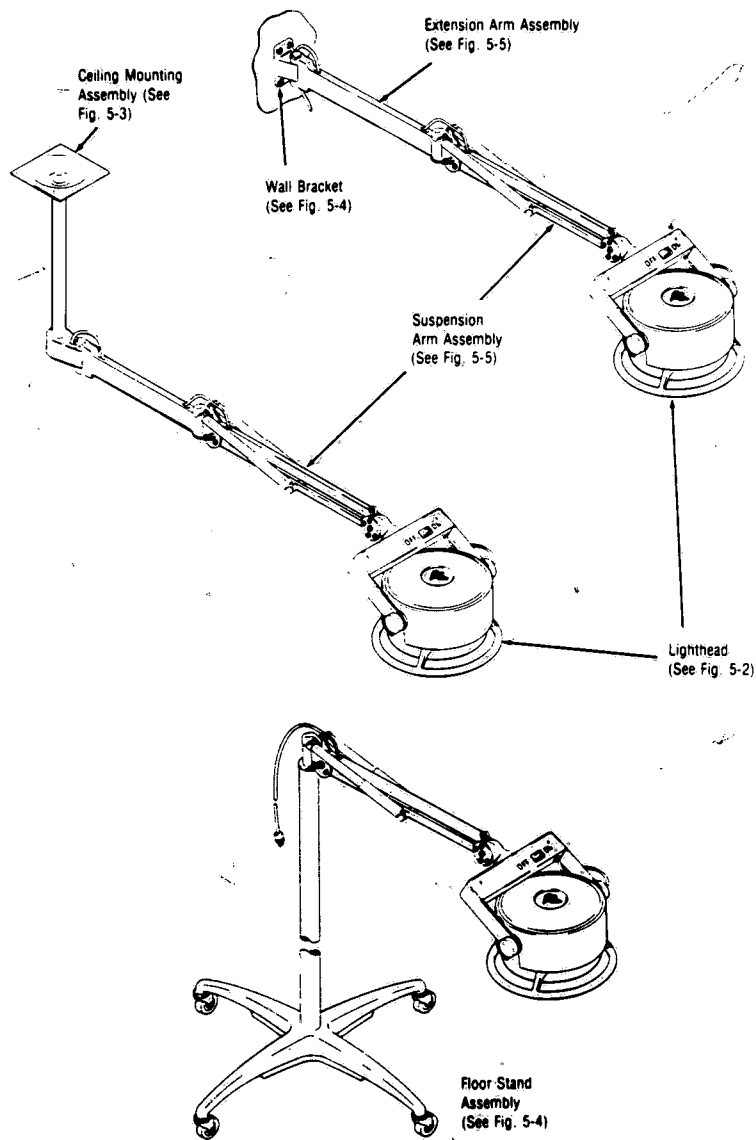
LIGHTING FIXTURE ASSEMBLY.
